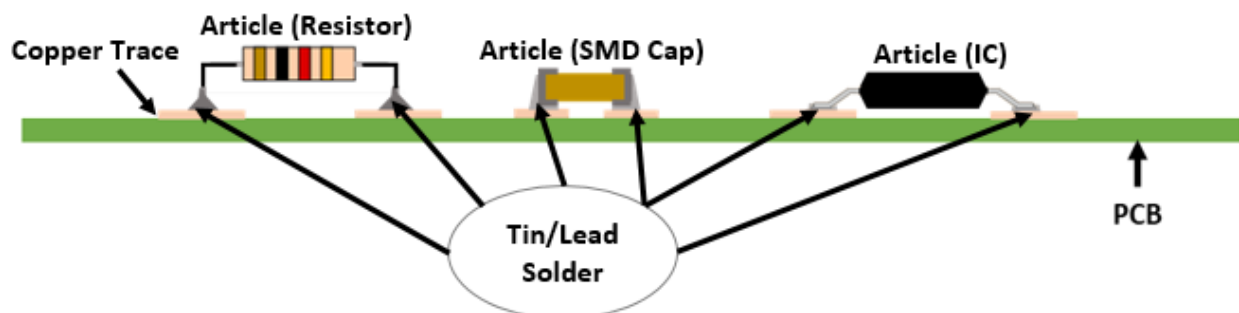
Complex Article (Product) Produced by Soldering Three Simple Articles to a Circuit Board with a Solder (Mixture)
